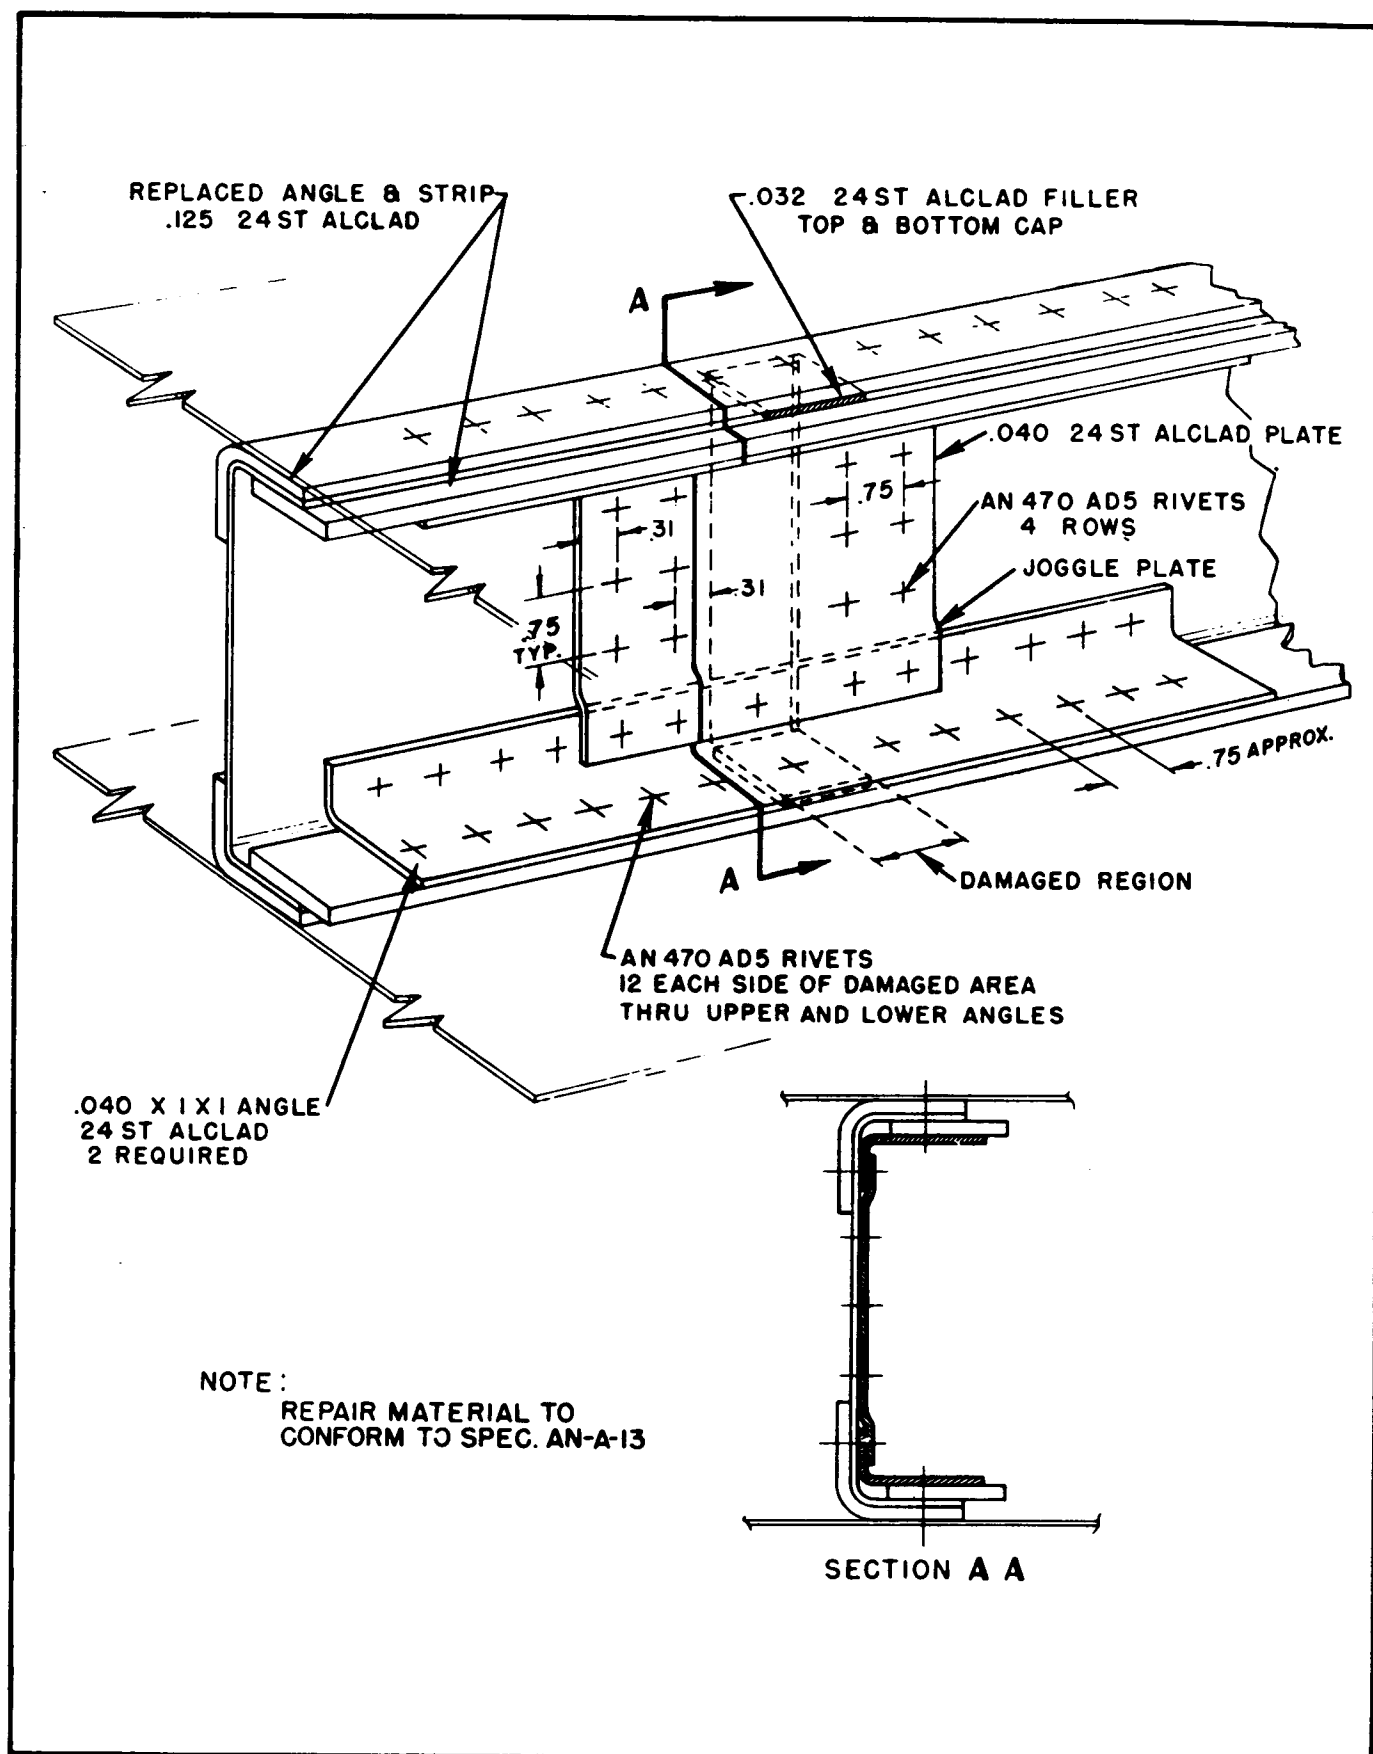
HORIZONTAL AND VERTICAL STABILIZER BEAM REPAIR
